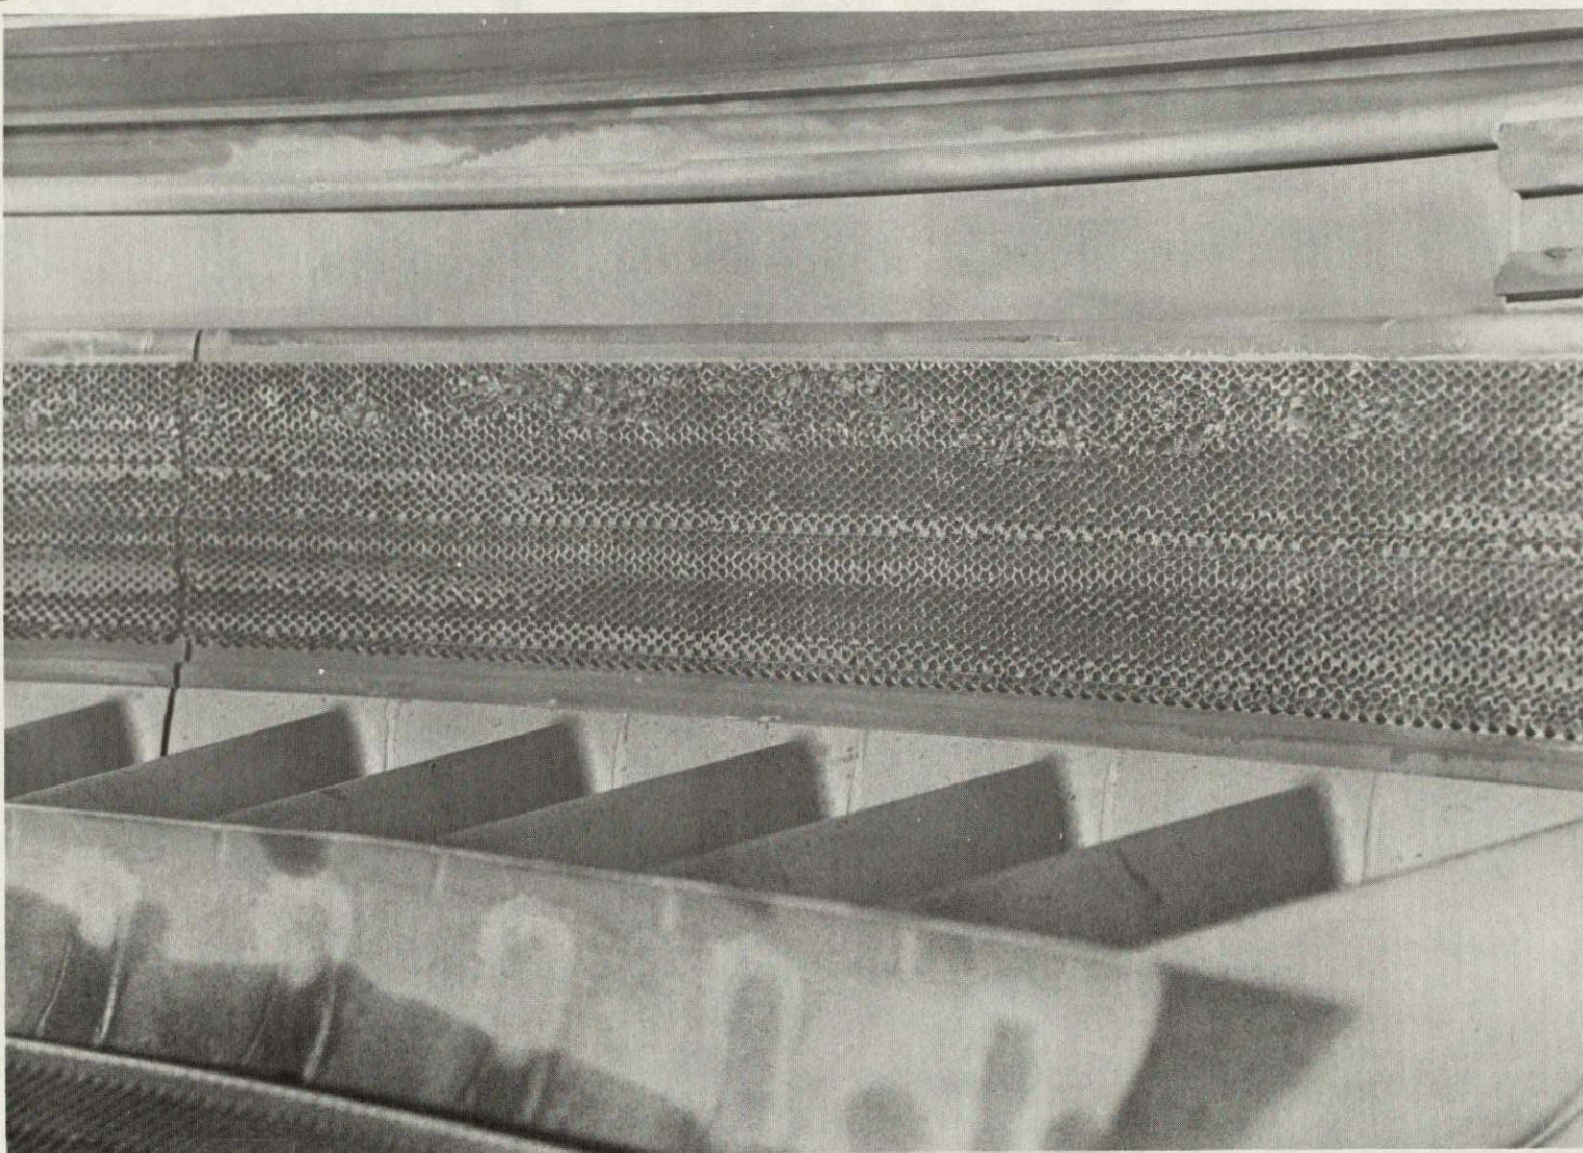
LP Turbine Stator Assembly, End View of Shroud and Seal Rubs.
